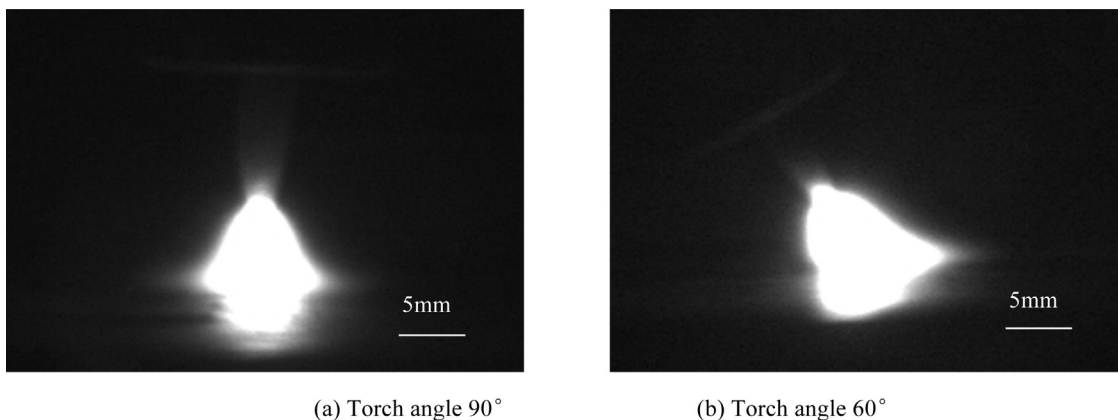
Photo of TIG welding arc for different torch angles (90 A): (a) torch angle 90° and (b) torch angle 60°.
